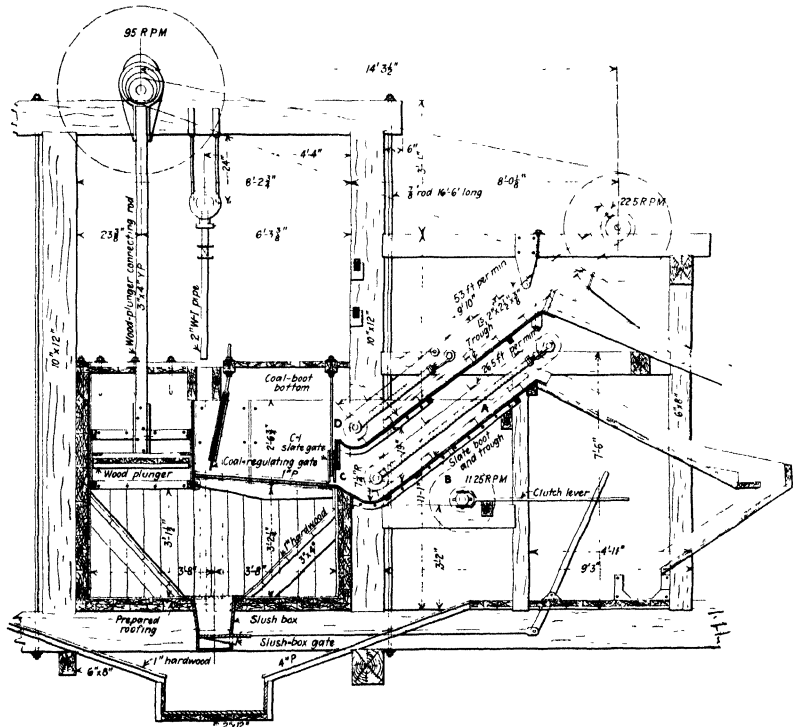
STANDARD JIG OF LEHIGH VALLEY COAL CO.
